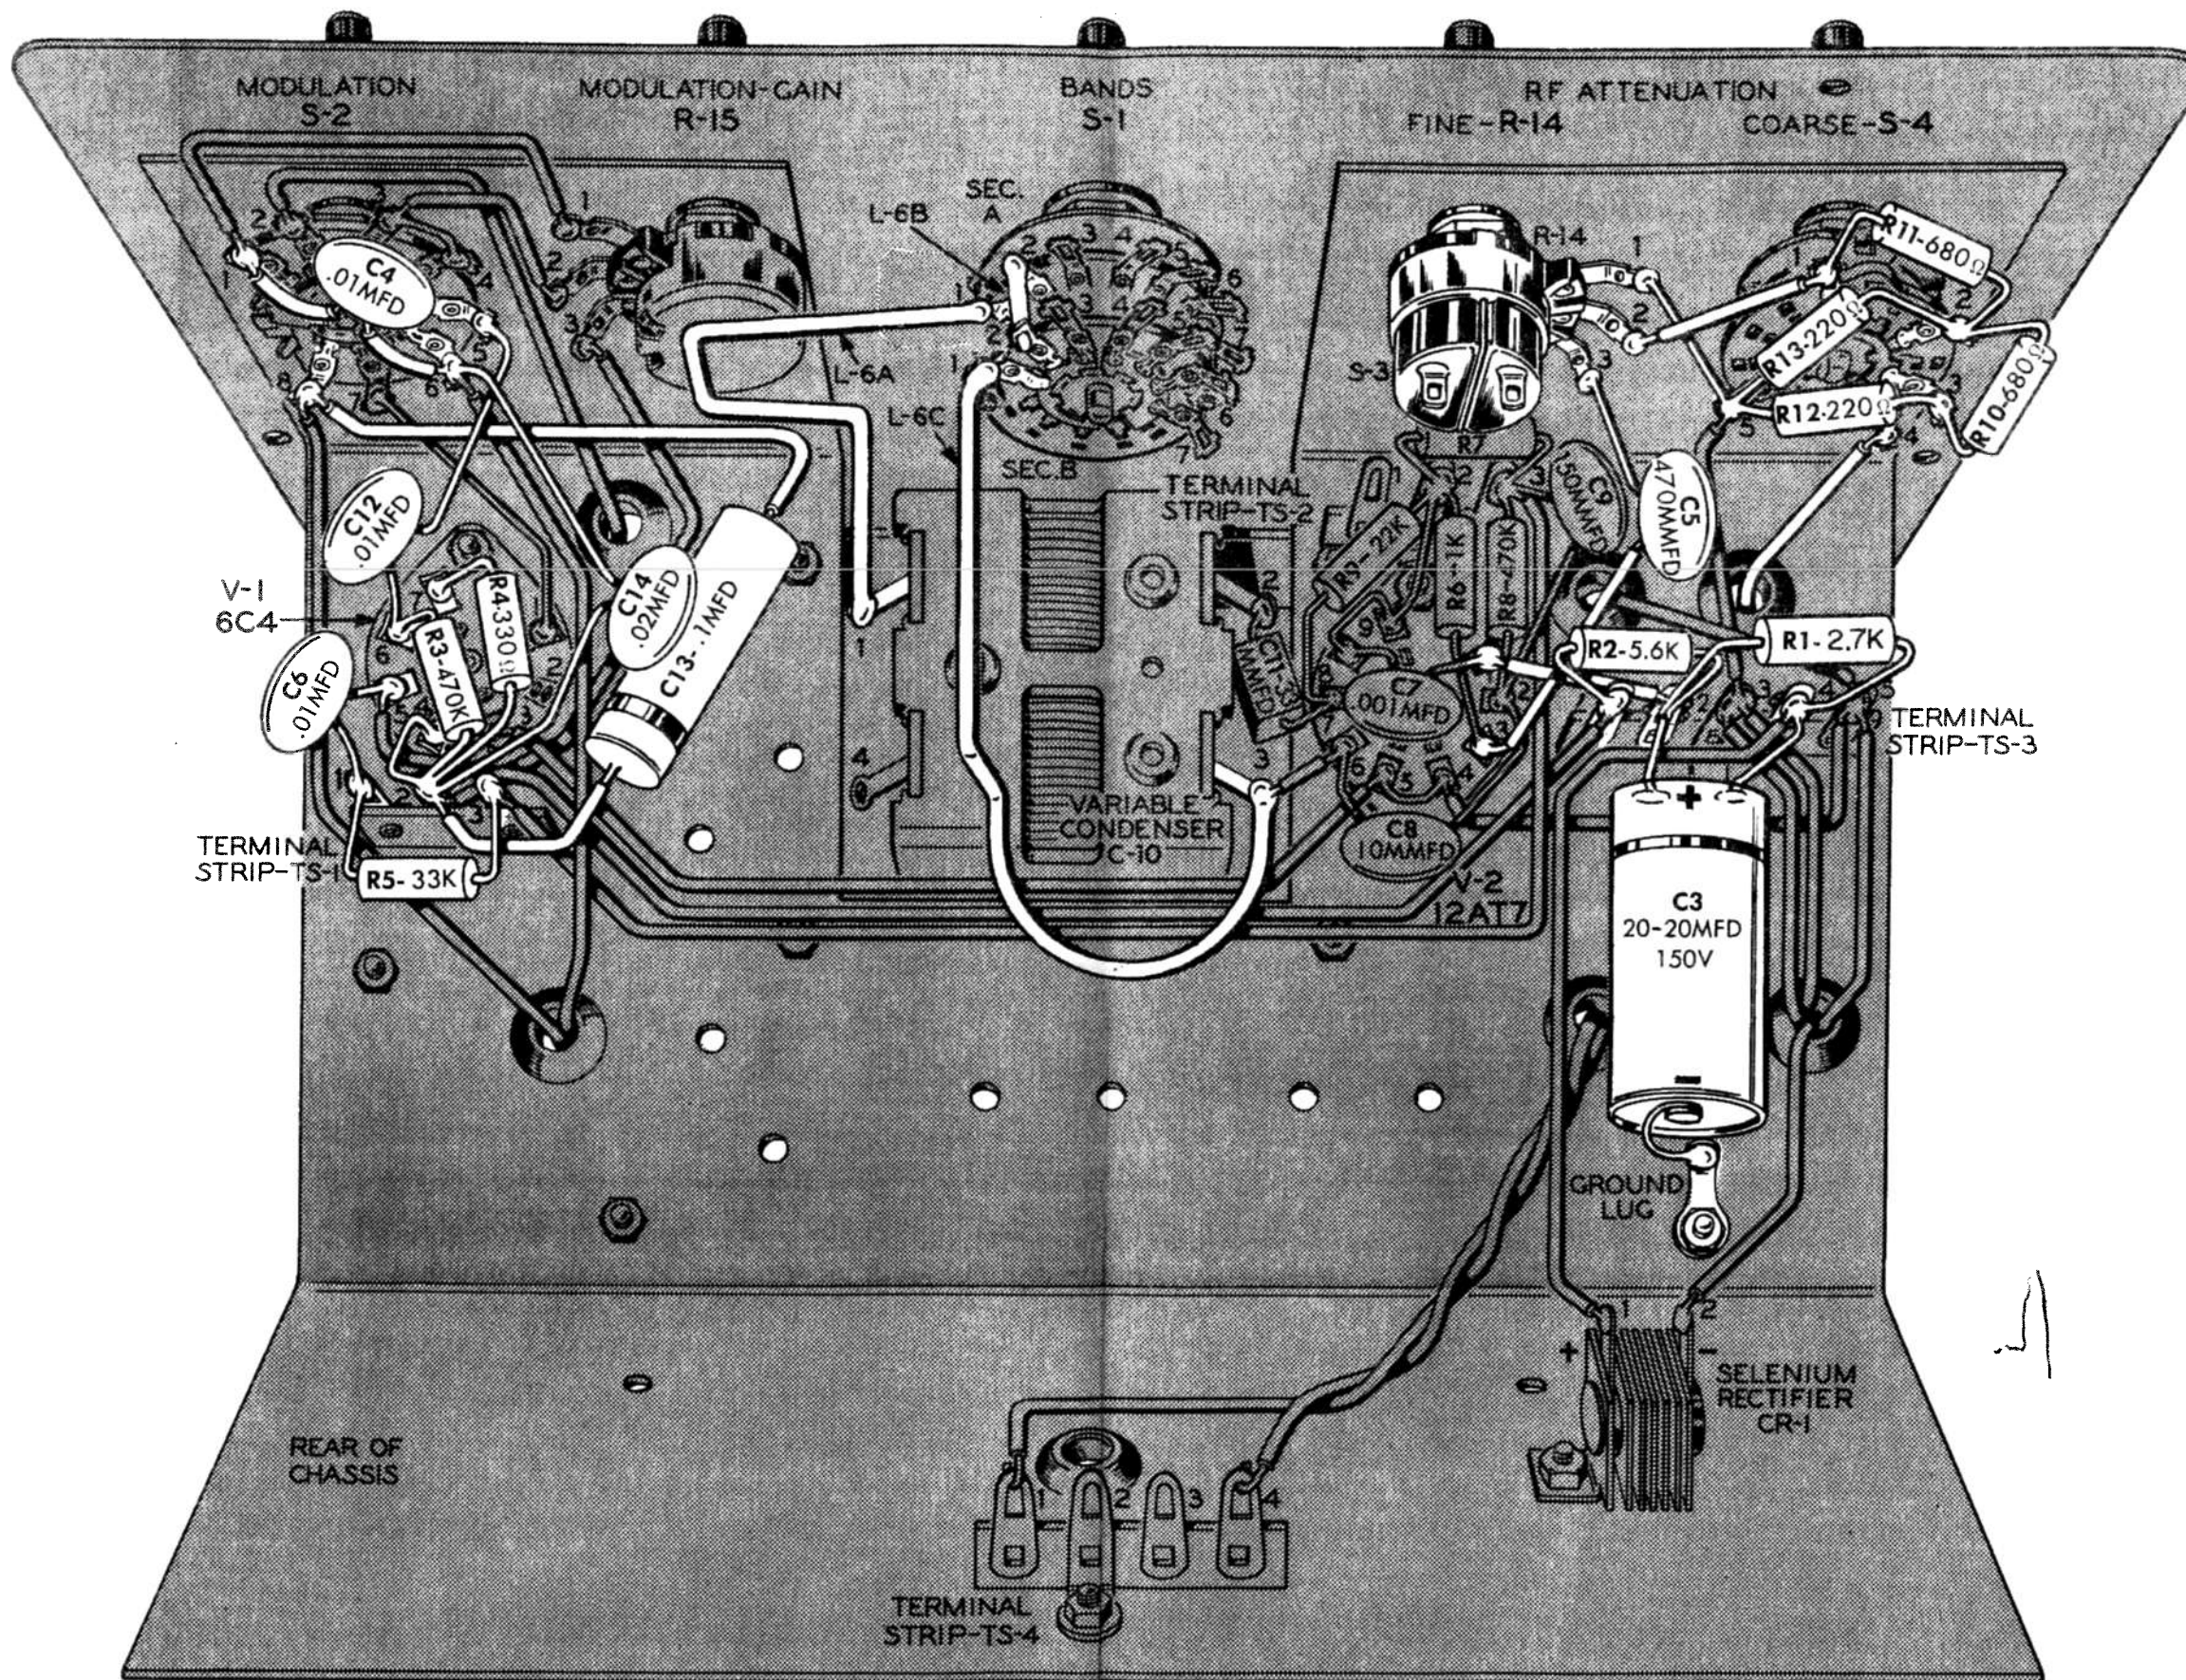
SECOND WIRING VIEW INSIDE THE CHASSIS.
